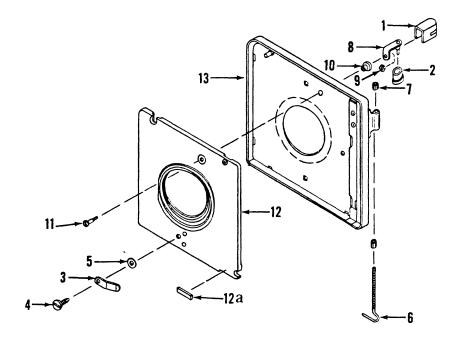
LENSBOARD COMPLETE FOR #1 SYNCHRO-COMPUR SHUTTER $\ensuremath{\mathrm{w/DIN}}$ Flash Fitting
